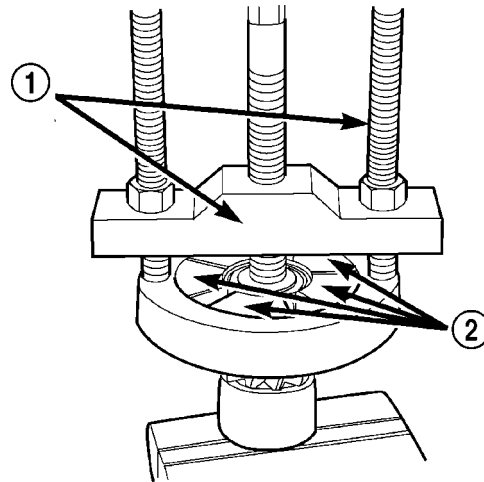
REVERSE IDLER AND COUNTERSHAFT GEARS
